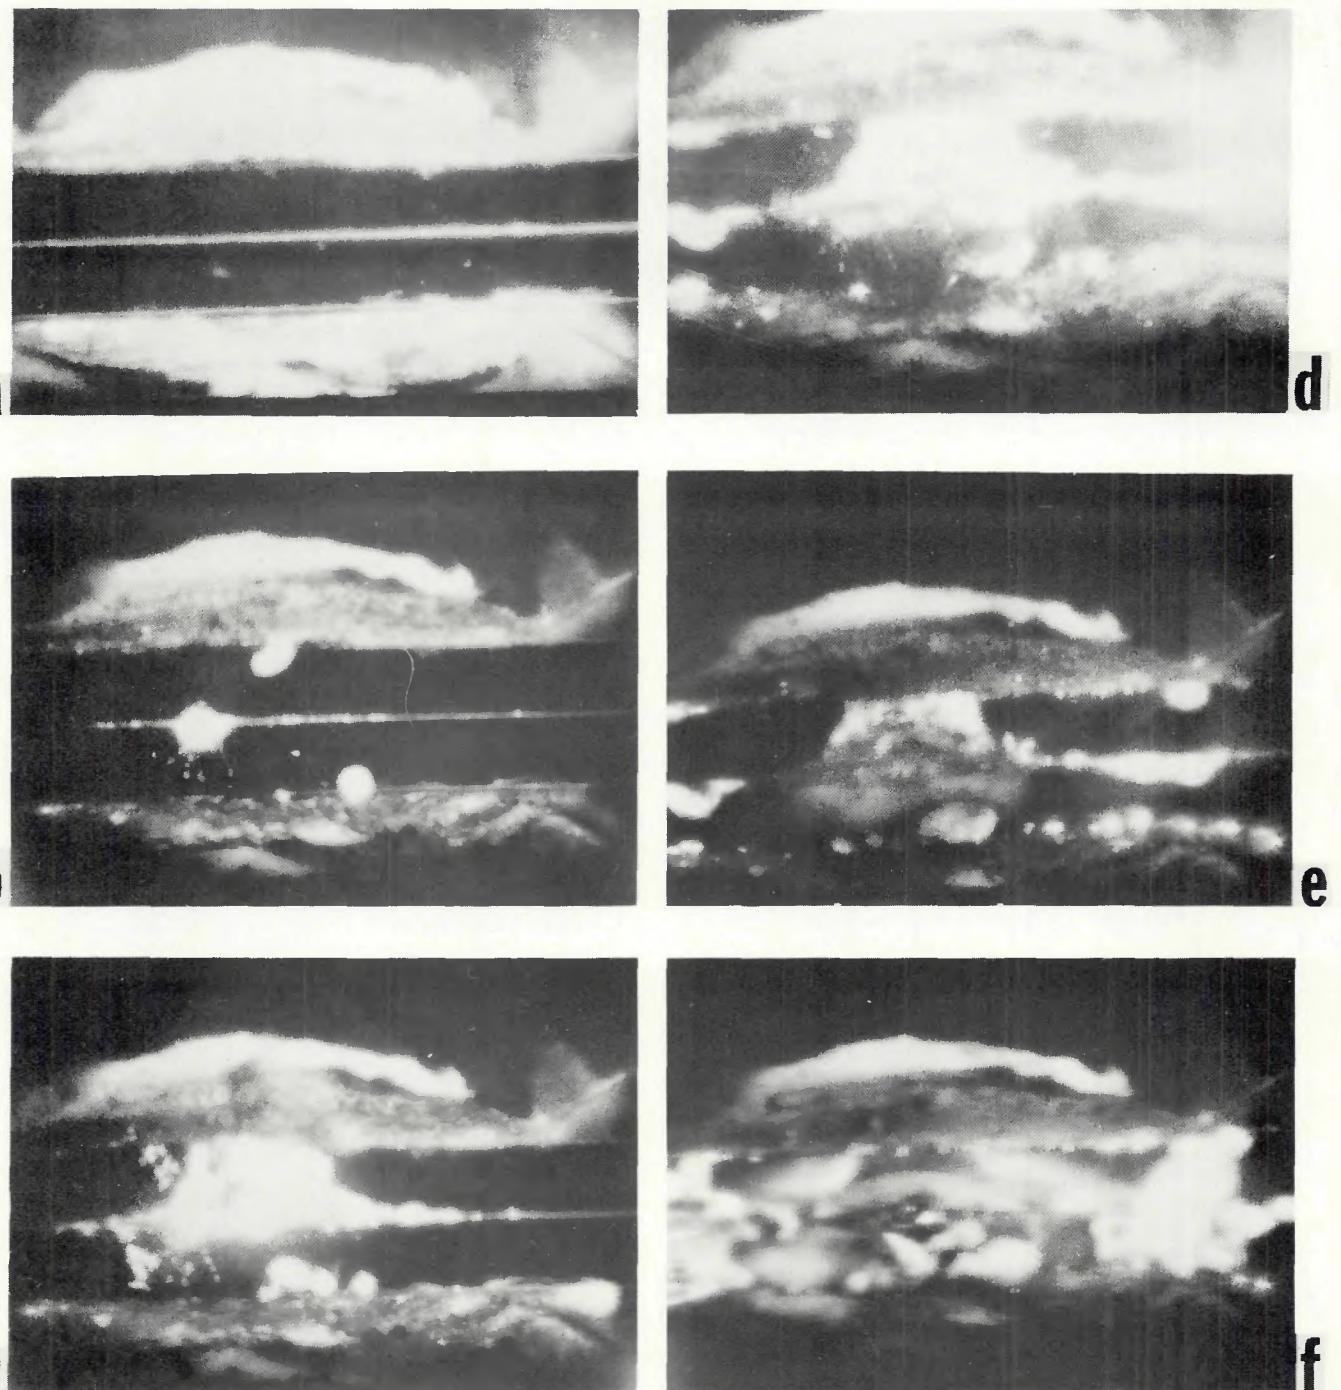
Sequence of photographs of welding process for 500 welds made with electrodes: (a) Condition of electrodes, (b) zinc coating begins to melt, (c) zinc molten at interfaces, (d) nugget begins to form, (e) nugget completely formed, (f) molten zinc at interfaces after current terminates
